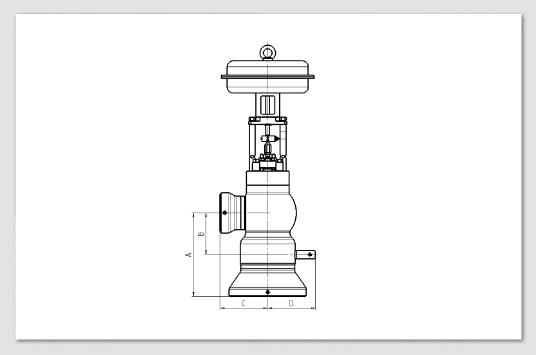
Dimensional drawing of Type DUP Steam-converting Valve
